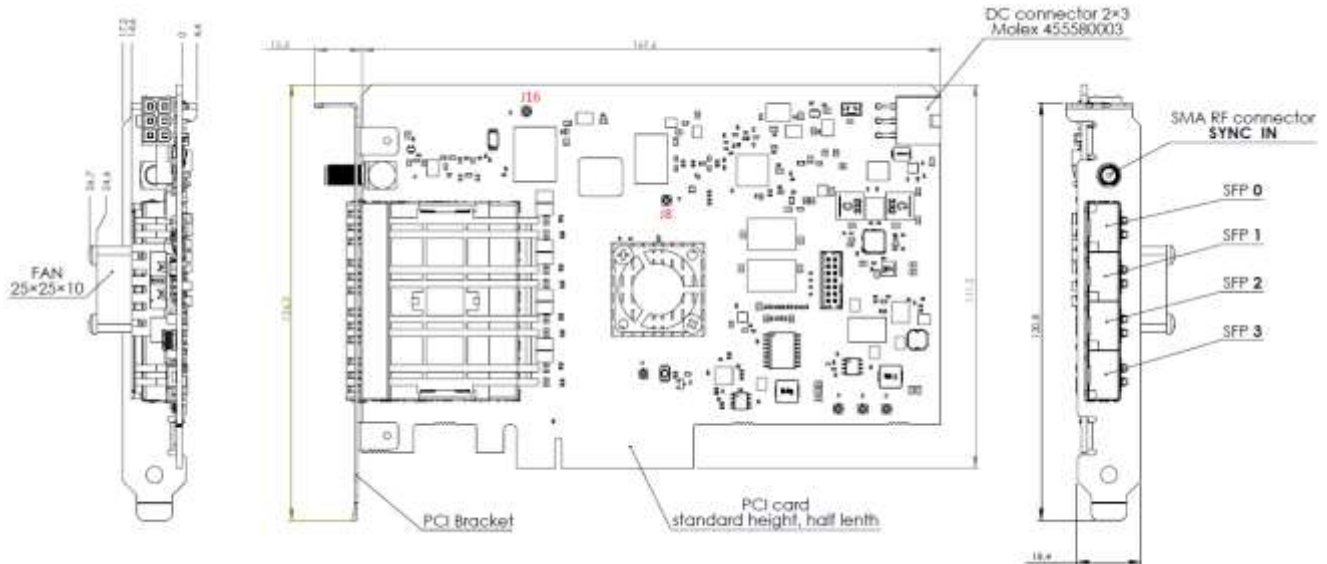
PCB top side and front panel views for type C board (dimensions in millimeters)
